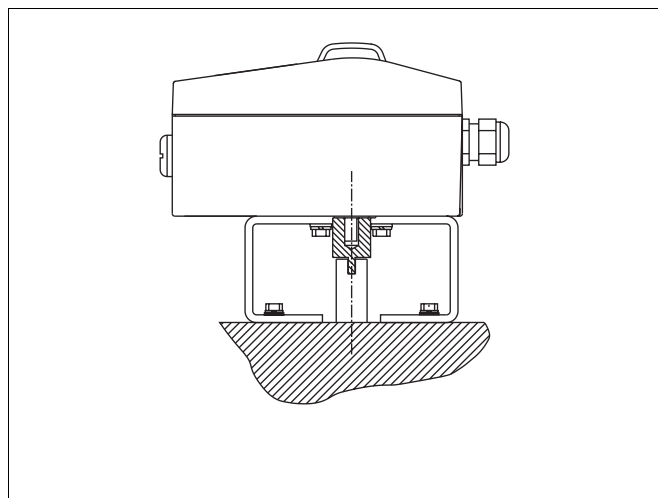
Mounting to rotary actuators to VDI/VDE 3845
